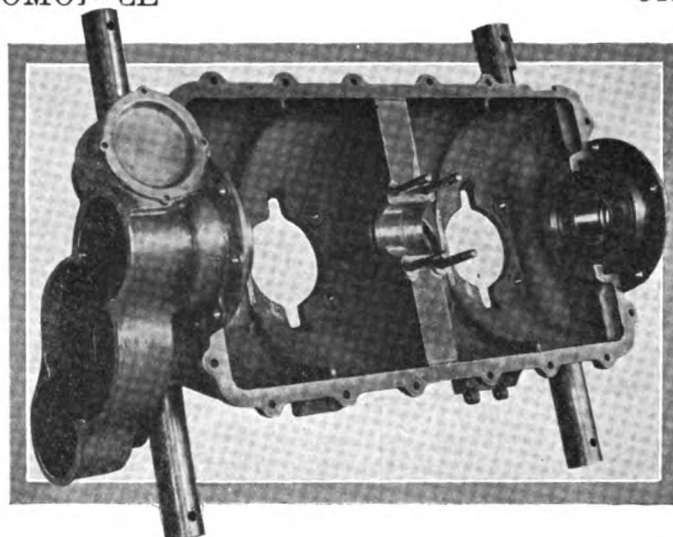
Crankcase of racing Maxwell showing main bearings. The end ones are ball and the center plain
